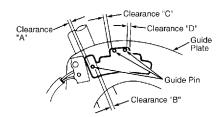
Checking Gearshift Lever Adjustment Clearances Courtesy of Mazda Motors Corp.
